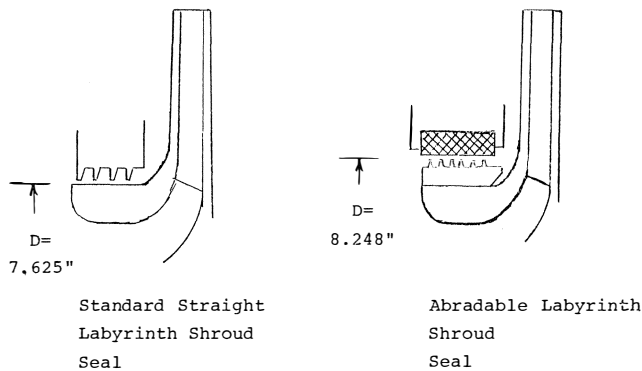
Standard and Abradable Shroud Seal Configurations for the Low Specific Speed Impeller.
